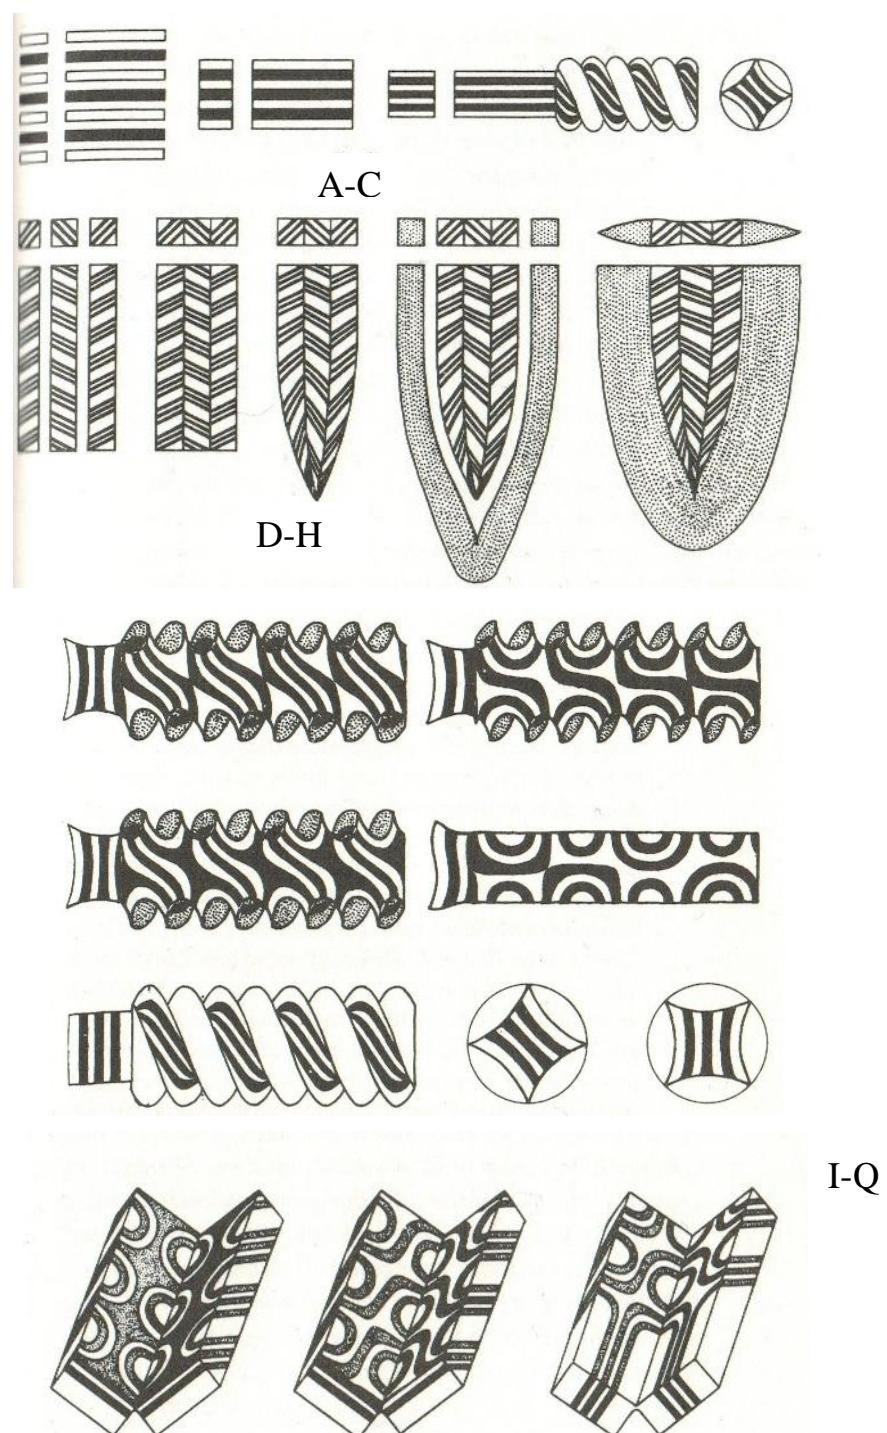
Pattern welding techniques, A-C: 4 plates of iron are welded together with 3 plates of steel and twisted; D-H after folding and smithing it, the piece of damast is welded to the swords' scabbard; I-Q: patterns that are made by carving and folding the metal.
